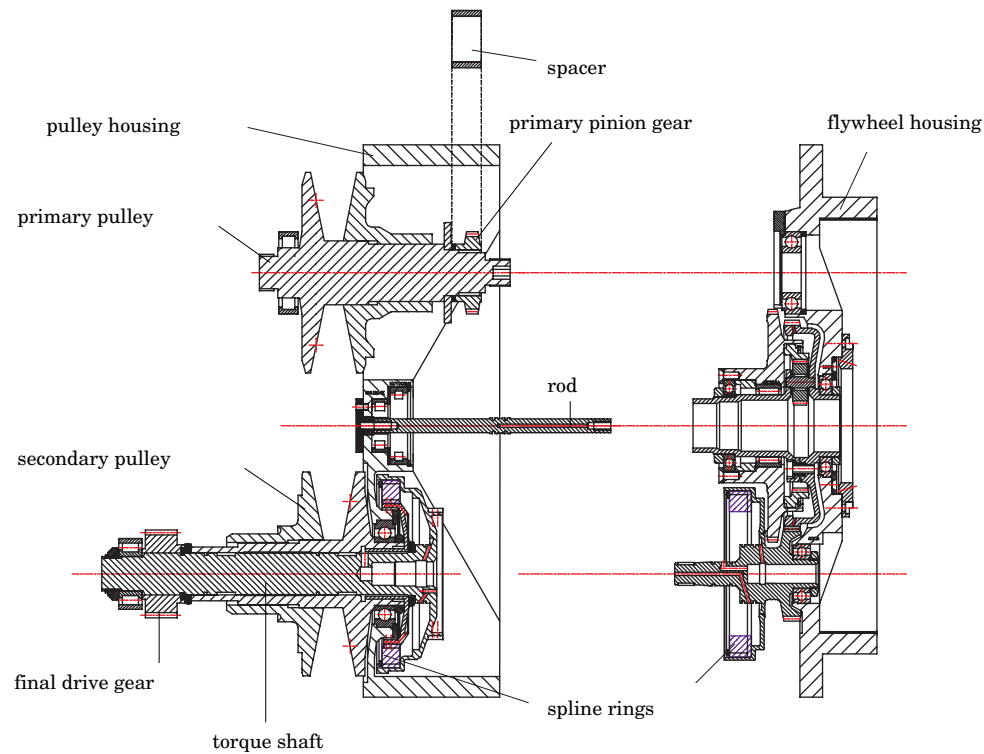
Cross-section A-A of flywheel and pulley housing
